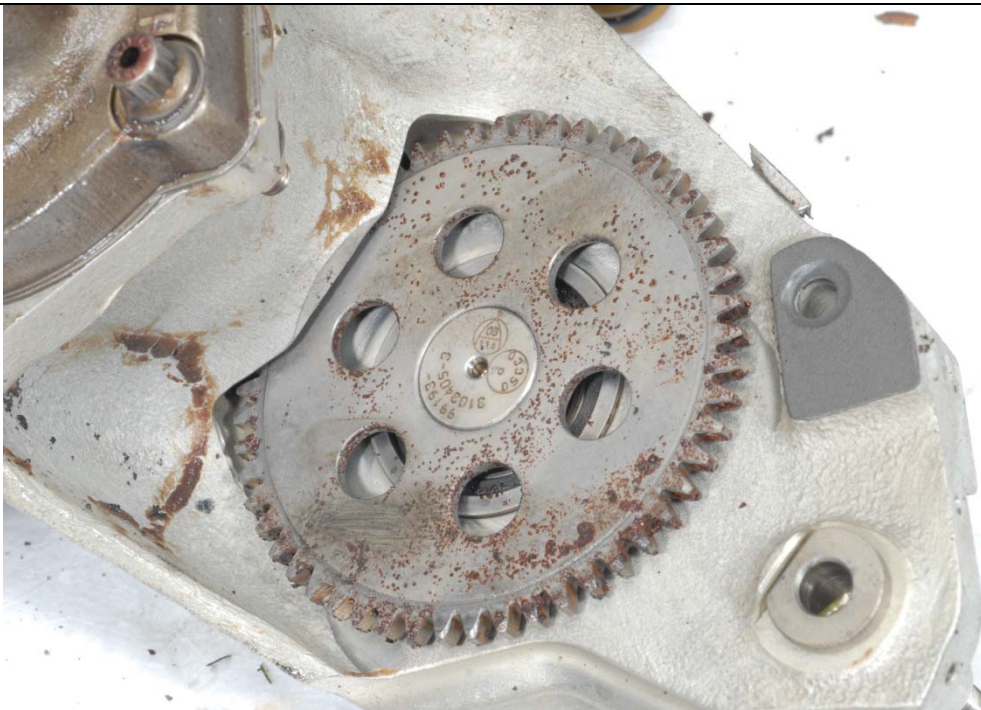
P-79297C, First Direct Drive Fuel-Control (DDFC) Gear
